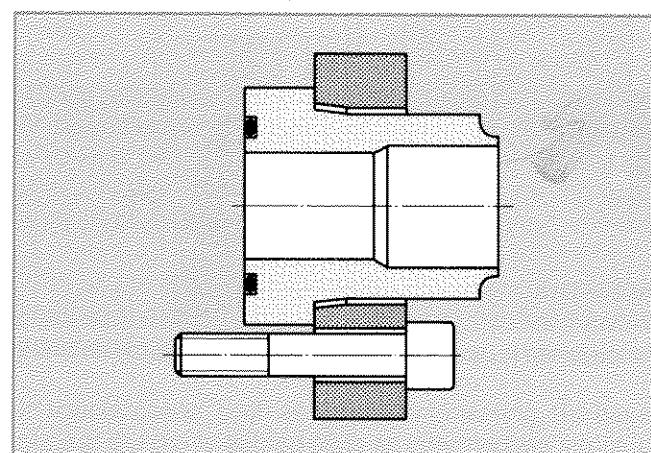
Flange joint with square flange, elastic seal (usually an O-ring), securing function by screws
